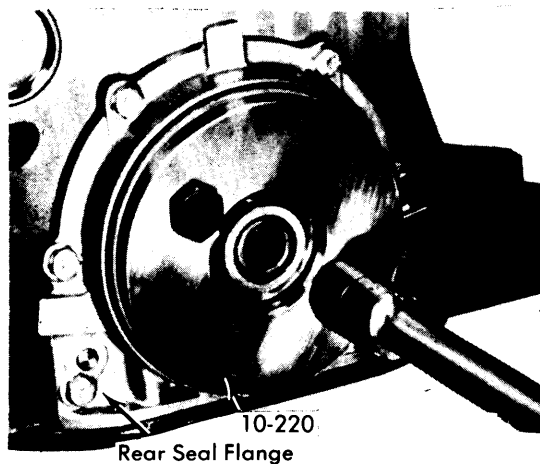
Using Special Tool to Install Rear Main Oil Seal
